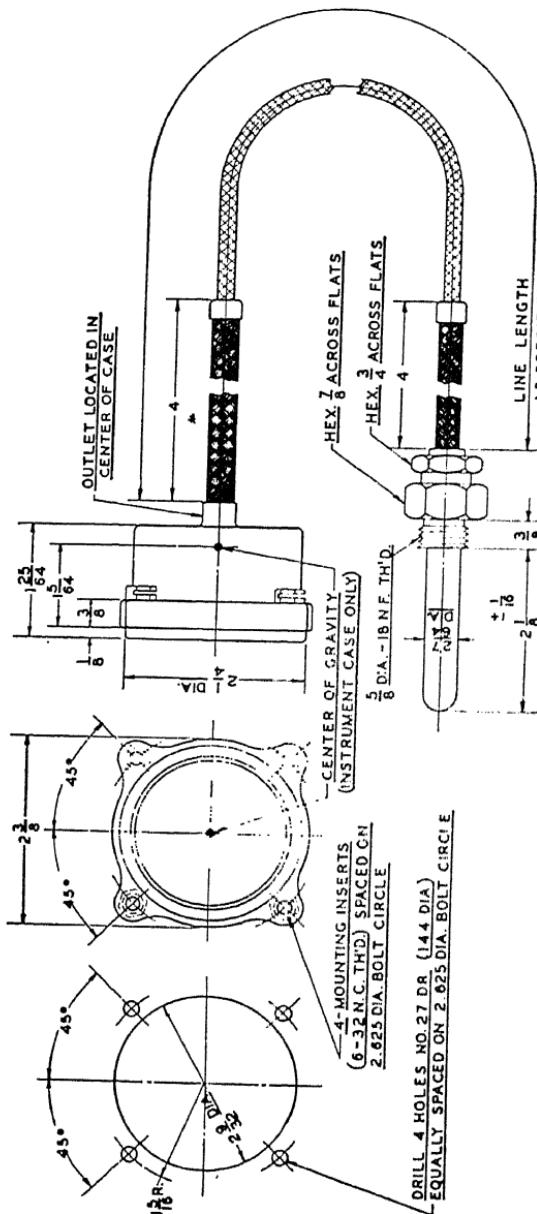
Installation Dimensions of Carburetor Air Thermometer
